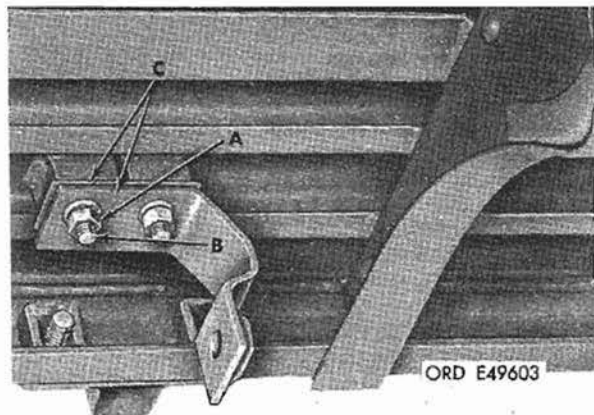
Disassembling or assembling engine access cover assembly - M274A1 and M274A2.
